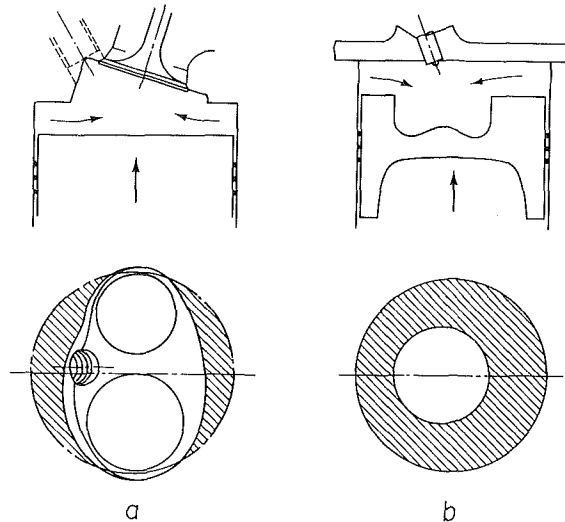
Schematics of how piston motion during compression stroke generates squish: (a) wedge-shaped SI engine combustion chamber; (b) bowl-in-piston direct-injection diesel combustion chamber
